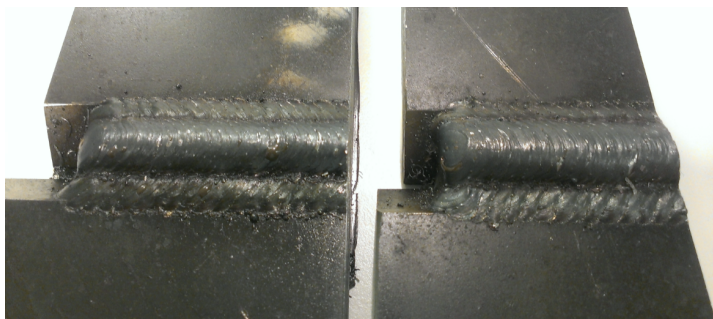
Butt joint type IV: 4-1 and 4-2 weld face
